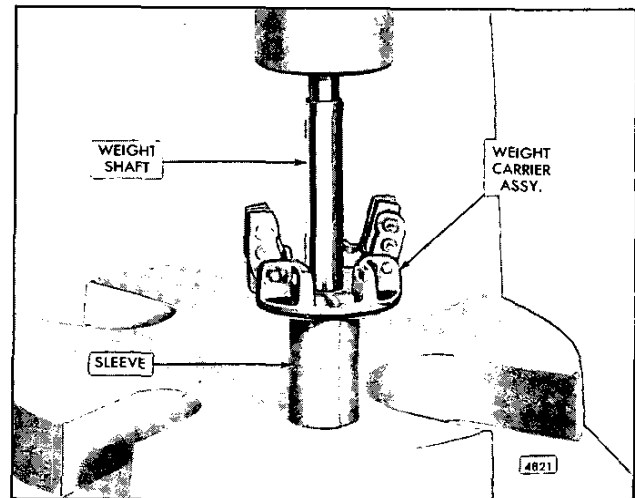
Removing Governor Weight Shaft from Weight Carrier Assembly
